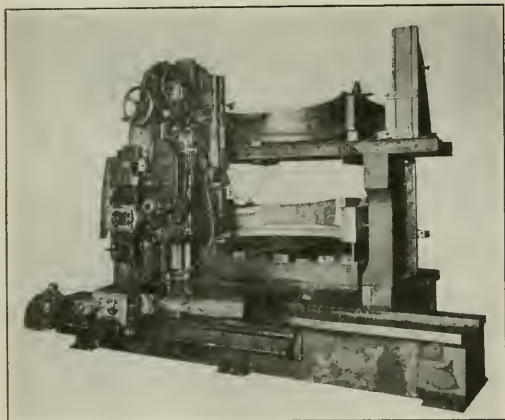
MACHINE CAPABLE OF TAKING HEAVY CUTS ON LARGE DIES AND PROVIDED WITH ELECTRICALLY CONTROLLED TRACER FOR USE WITH MODELS OF WOOD, PLASTER OR OTHER SOFT MATERIALS
